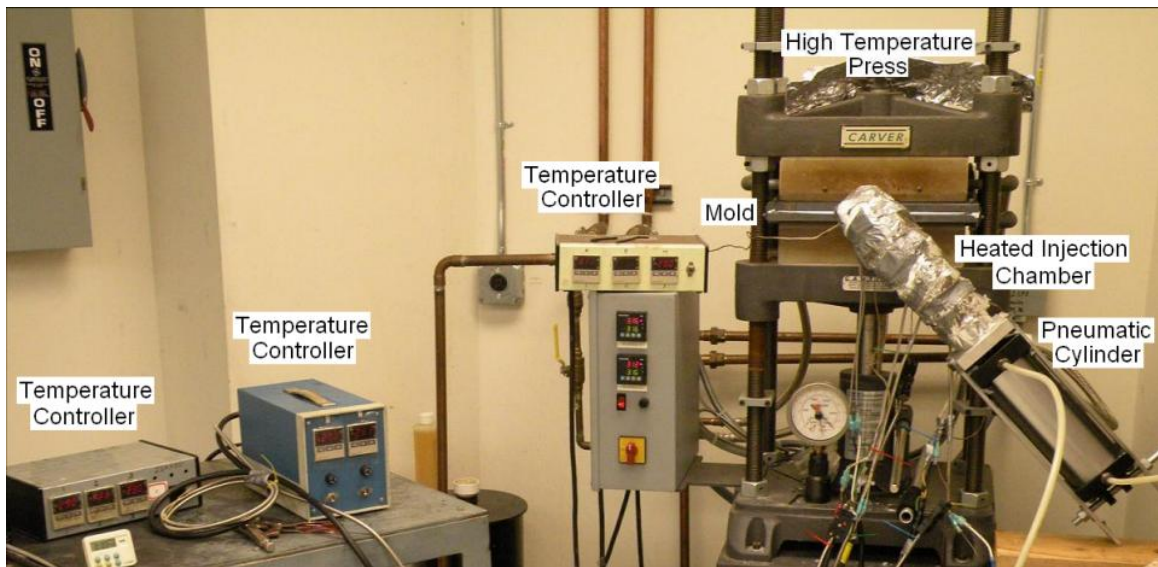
Photograph of RTM system used for the manufacturing of composite laminates
